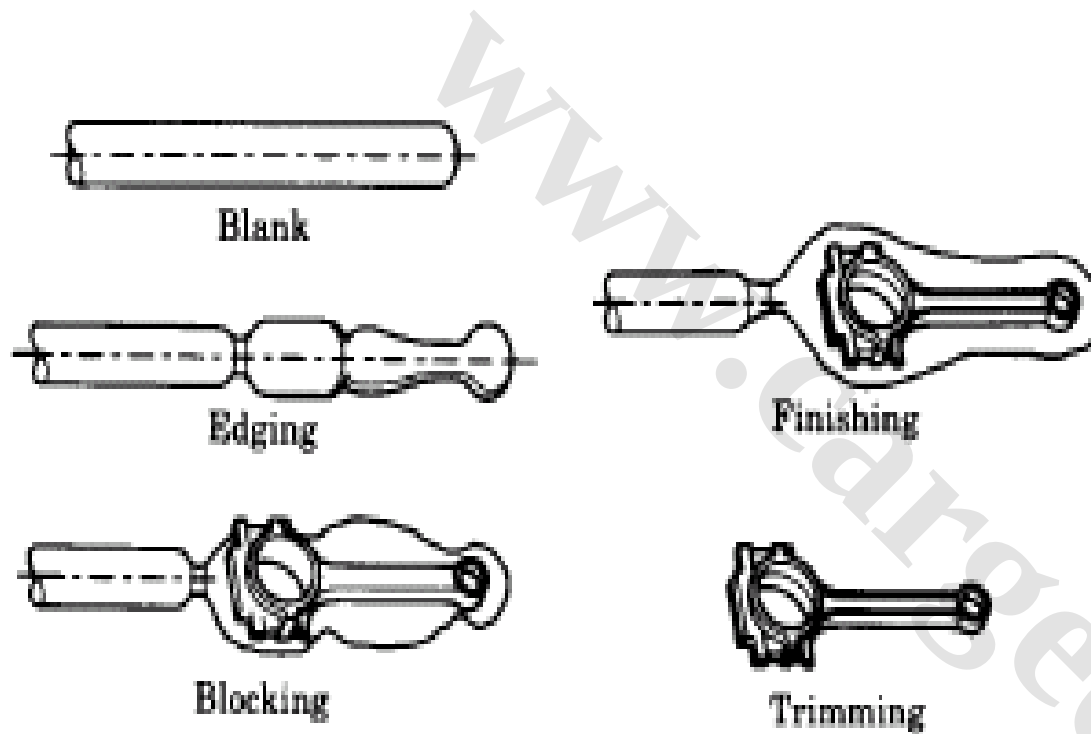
Stages in forging a connecting rod for an internal combustion engine. Note the amount of flash that is necessary to fill the die cavities properly.
